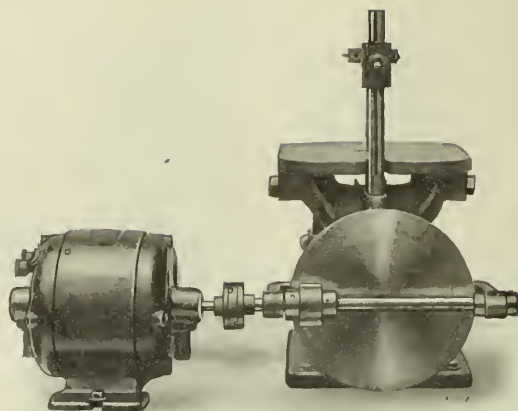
Rear View of Holmes Filing Machine, showing Variable-speed Drive
